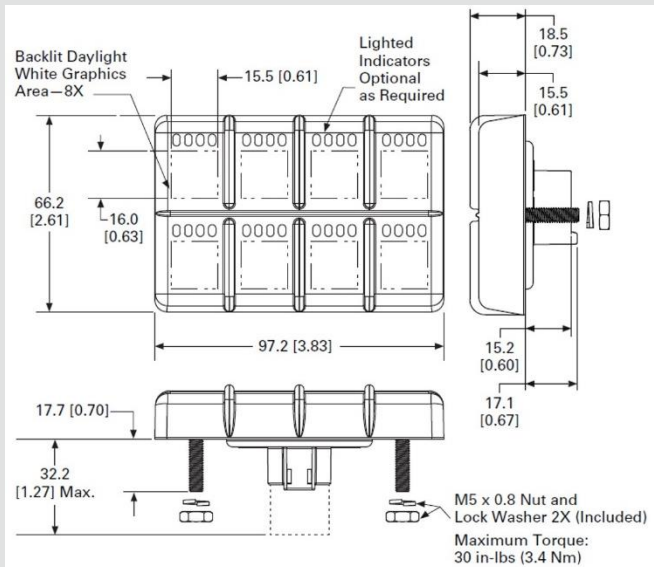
Dimensions of KeypadModul with 8 buttons (in mm)
